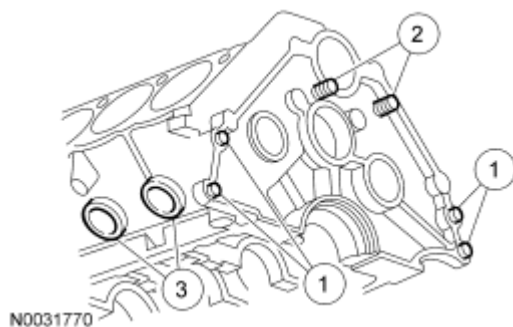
Identifying Cylinder Block Dowels, Oil Gallery Plugs And Coolant Jacket Plugs
